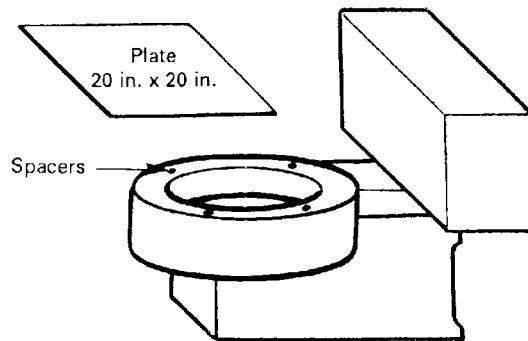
TEST PLATE (Applicable to para. 7.1.9.1)
